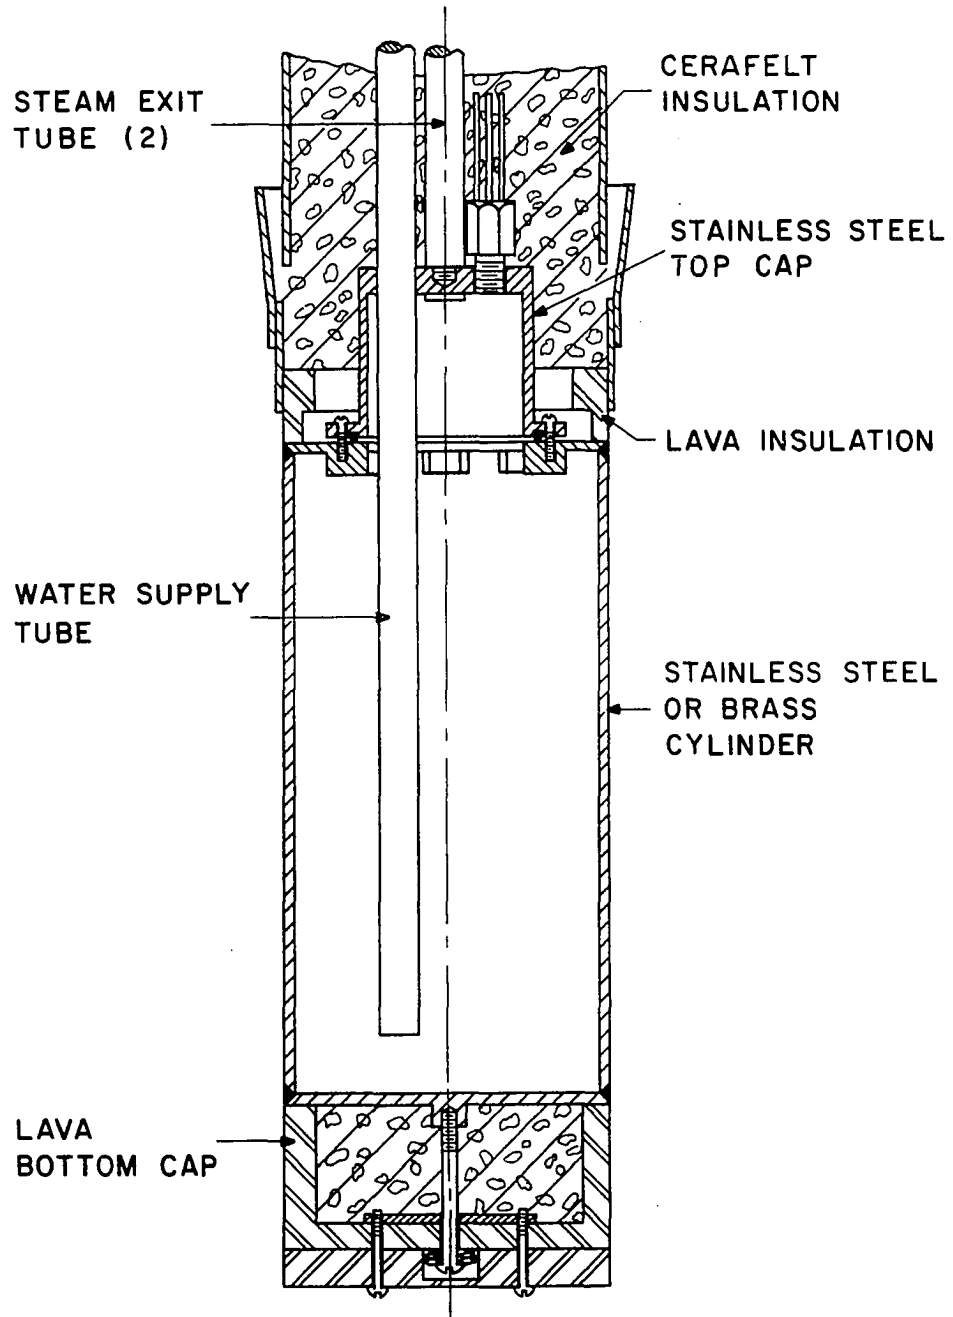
Assembly Drawing for Test Cylinder and Lead Tube.
